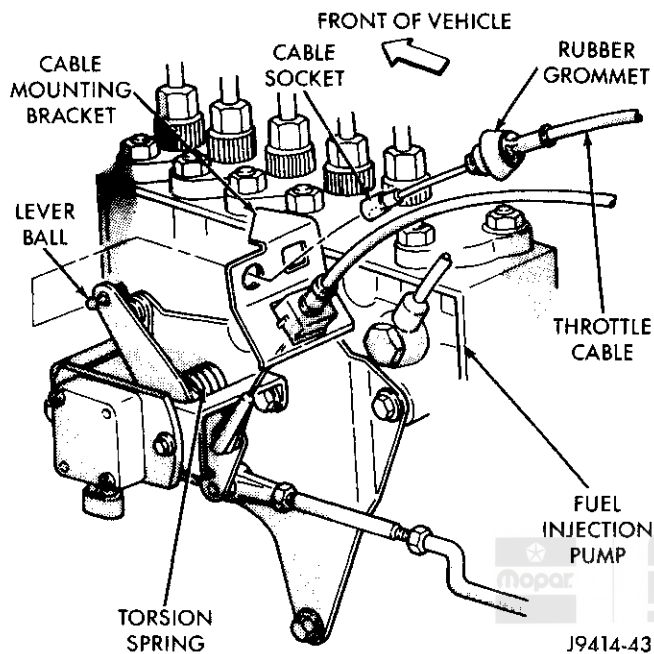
Throttle Cable at Injection Pump—Diesel Engine
